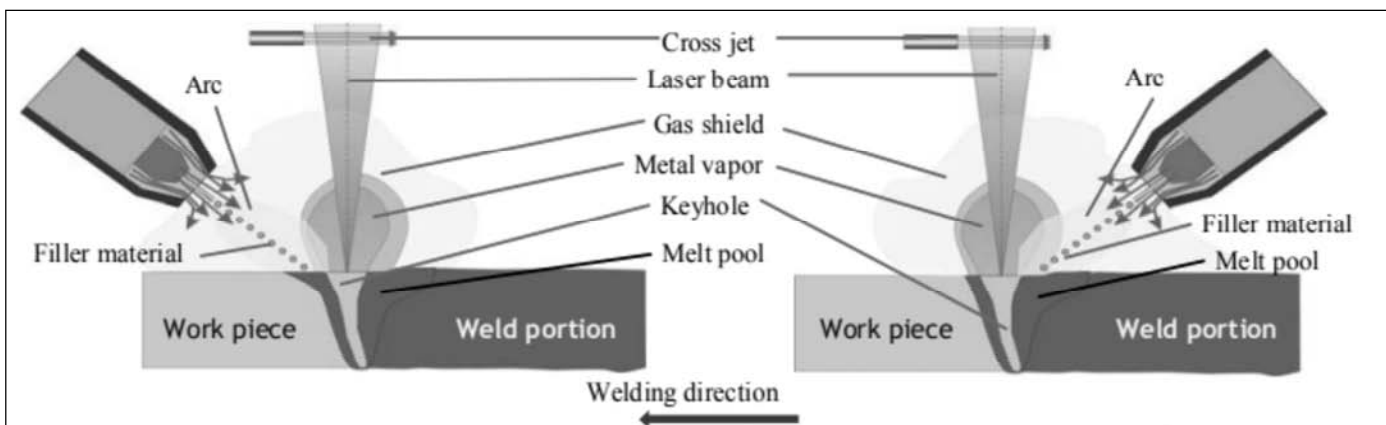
Schematic representation of laser hybrid welding with leading arc and leading laser arrangements [14]
